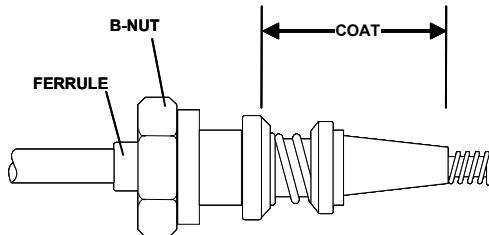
Lubricate Ignition Wire with MS-122AD
